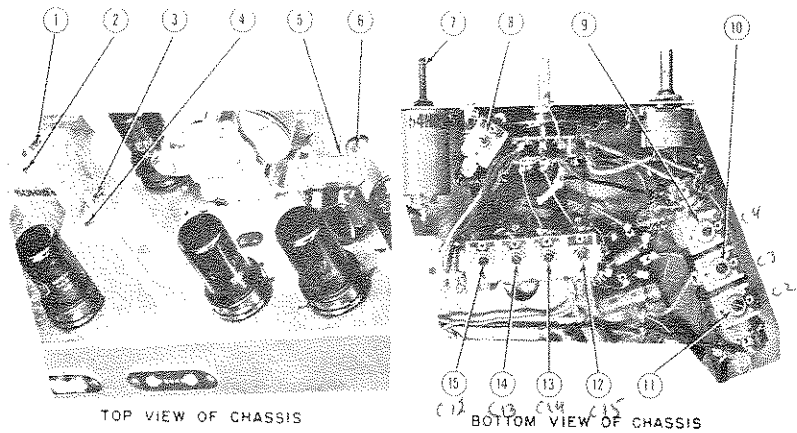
Top and bottom views of the receiver locating slugs, padders and trimmers for alignment purposes.
